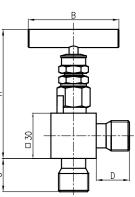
STRAIGHT-WAY VALVE WITH INNER THREADS 967 31 .., dimensional drawing, scheme, application
